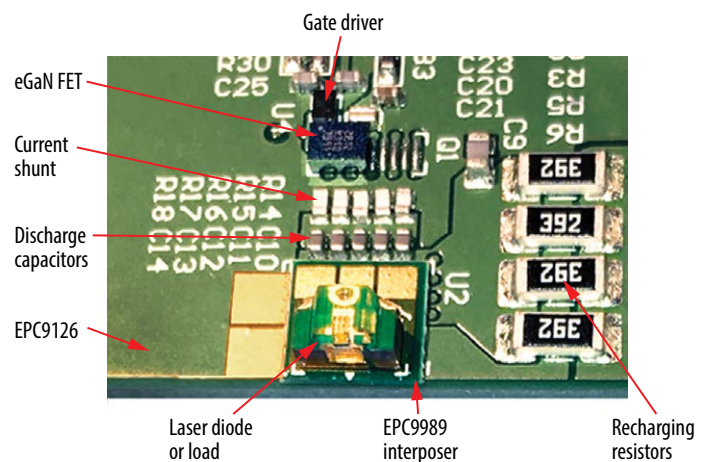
Laser diode mounting on output terminals with interposer. Please note that the photograph is of the EPC9126 demo board, but the same interposers and footprints apply to the EPC9172.
